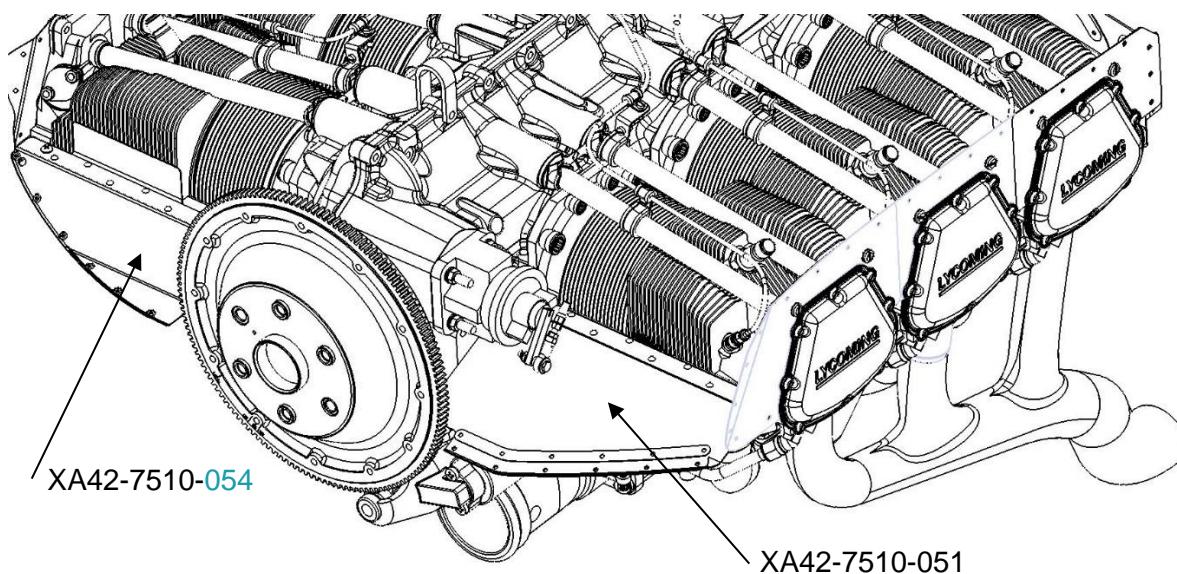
Identification of the baffle assemblies XA42-7510-051/-054
